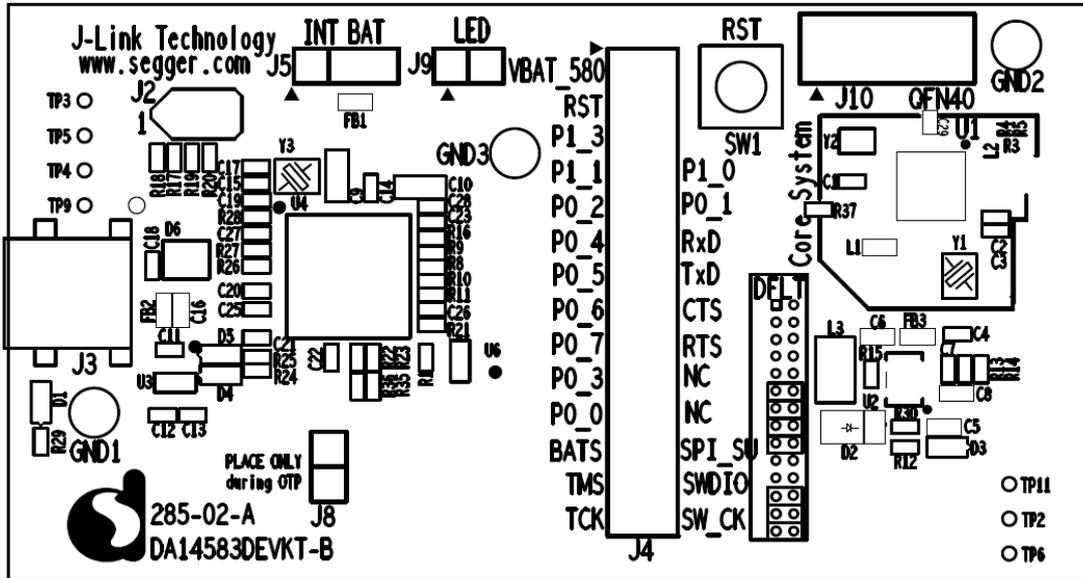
Components on PCB top layer of the DA14583 Basic kit
